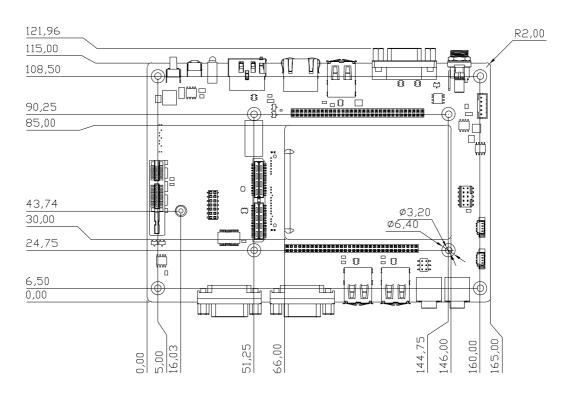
MIOe-DB2000 Mechanical Drawing (Top Side, with optional DC Jack)
